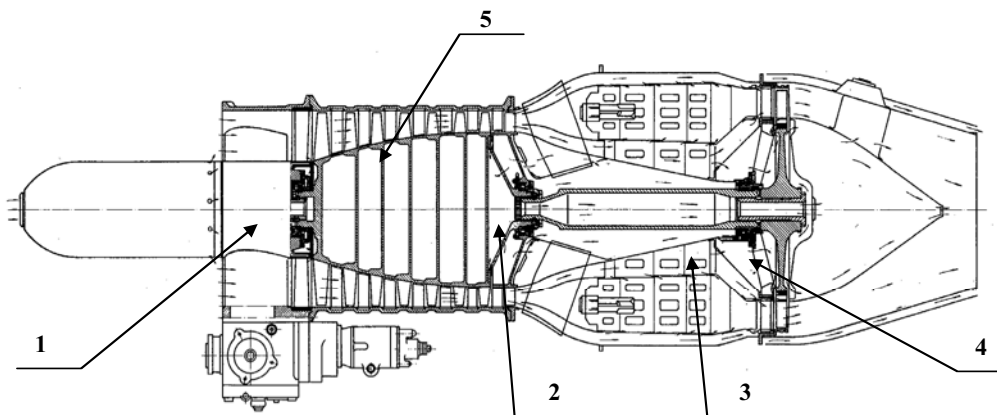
Investigated turbine engine: 1 – fore bearing, 2 – central bearing, the point of coupling both parts of the shaft (turbine's shaft, compressor' shaft), 3 – rear bearing, 4 – turbine, 5 - compressor
